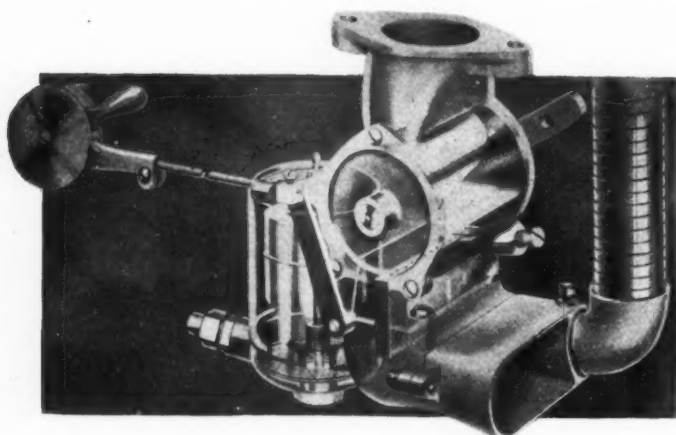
Phantom view of Master carbureter made by Master Carbureter Corp., Los Angeles, Cal
